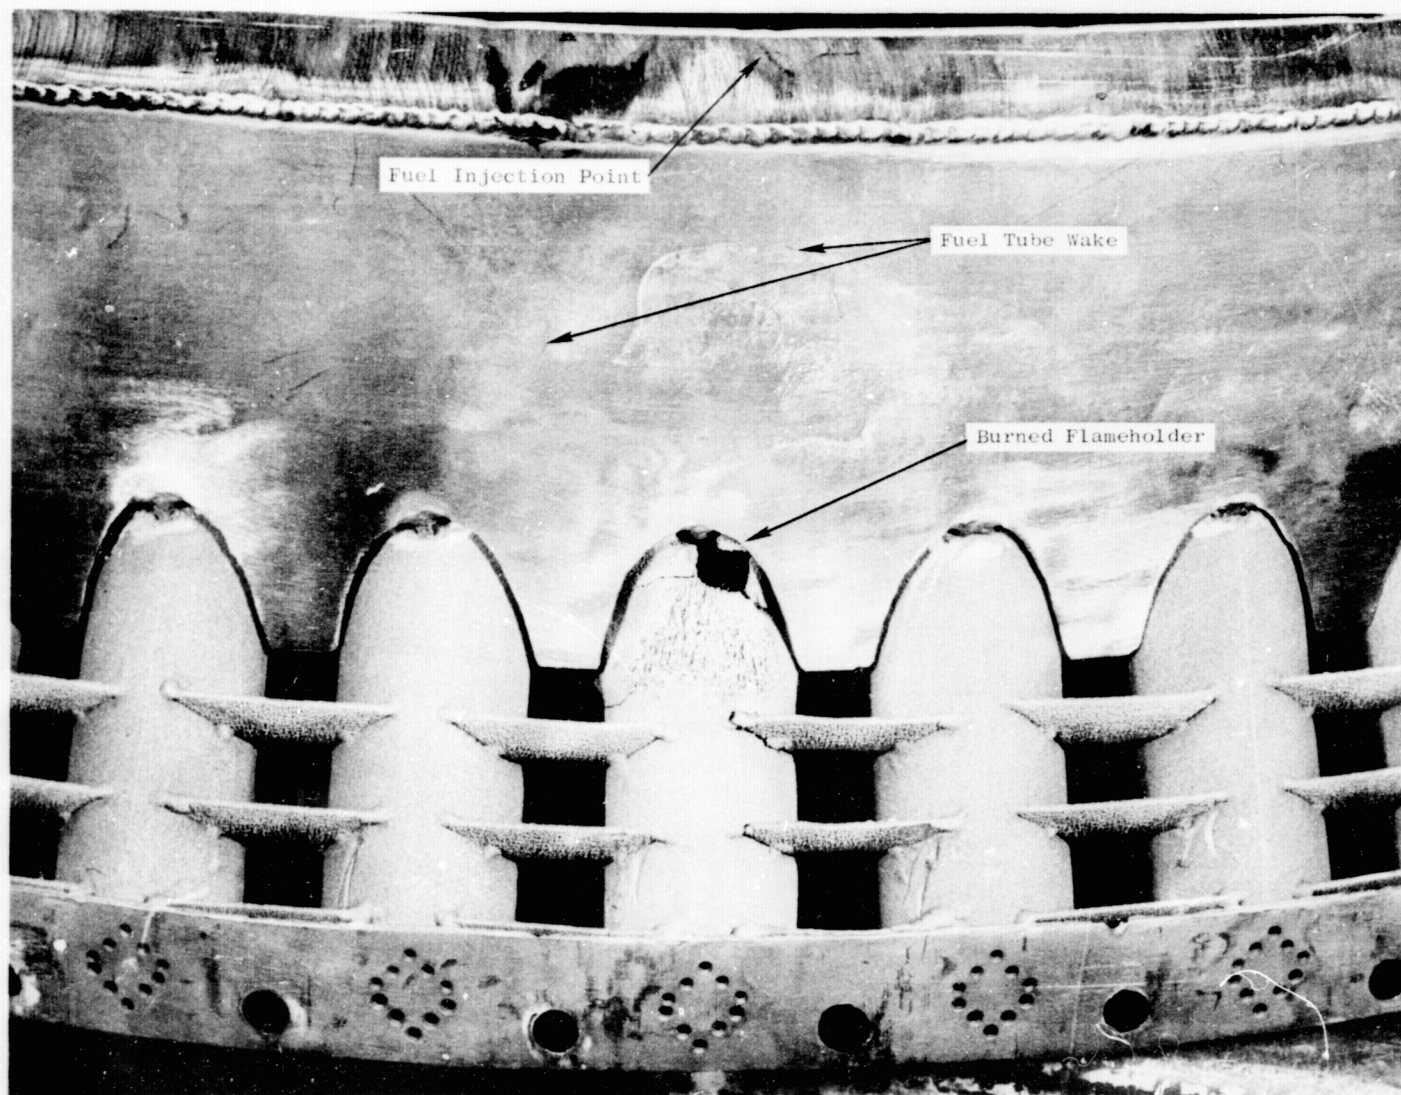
Damaged Radial/Axial Staged Combustor Flameholder Array.
